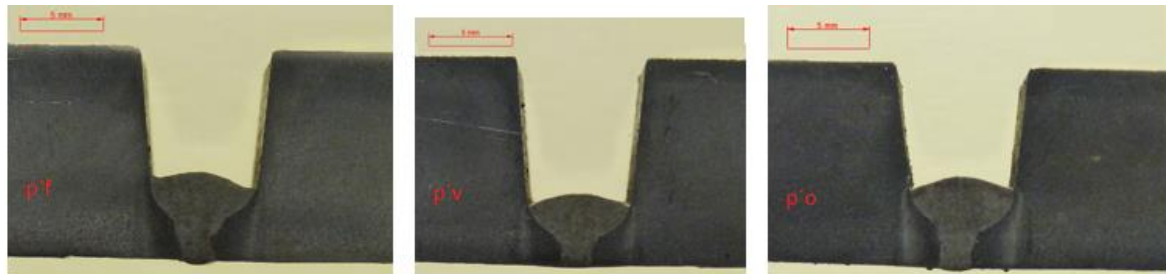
Section cross string, realized with narrow groove joint without covers joint at points where welding the top positions Flat welding ($p'f$), Vertical welding($p'v$) and Overhead welding ($p'o$) with CMT
